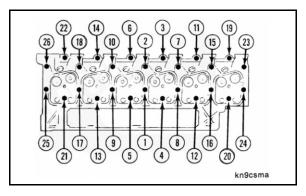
TIGHTEN CYLINDER HEAD CAPSCREWS
